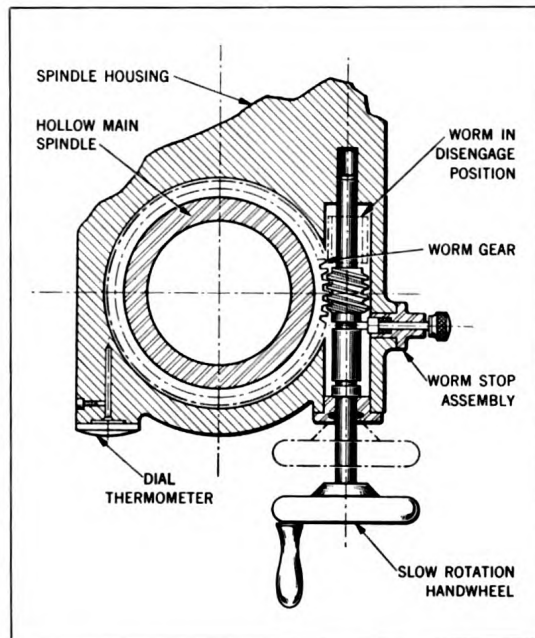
Worm and gear assembly for hand rotation of main spindle.
